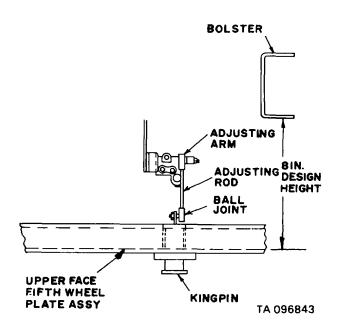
Ride height dimension adjustment, air mounted kingpin
